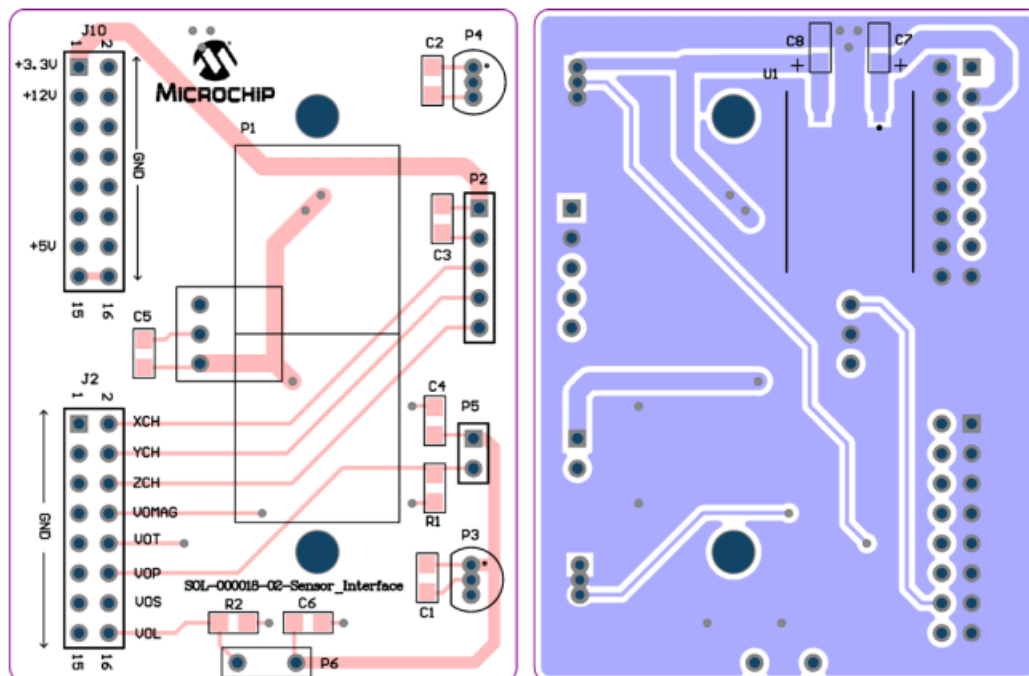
PCB top layer and top components, bottom layer and bottom components (bottom view)
